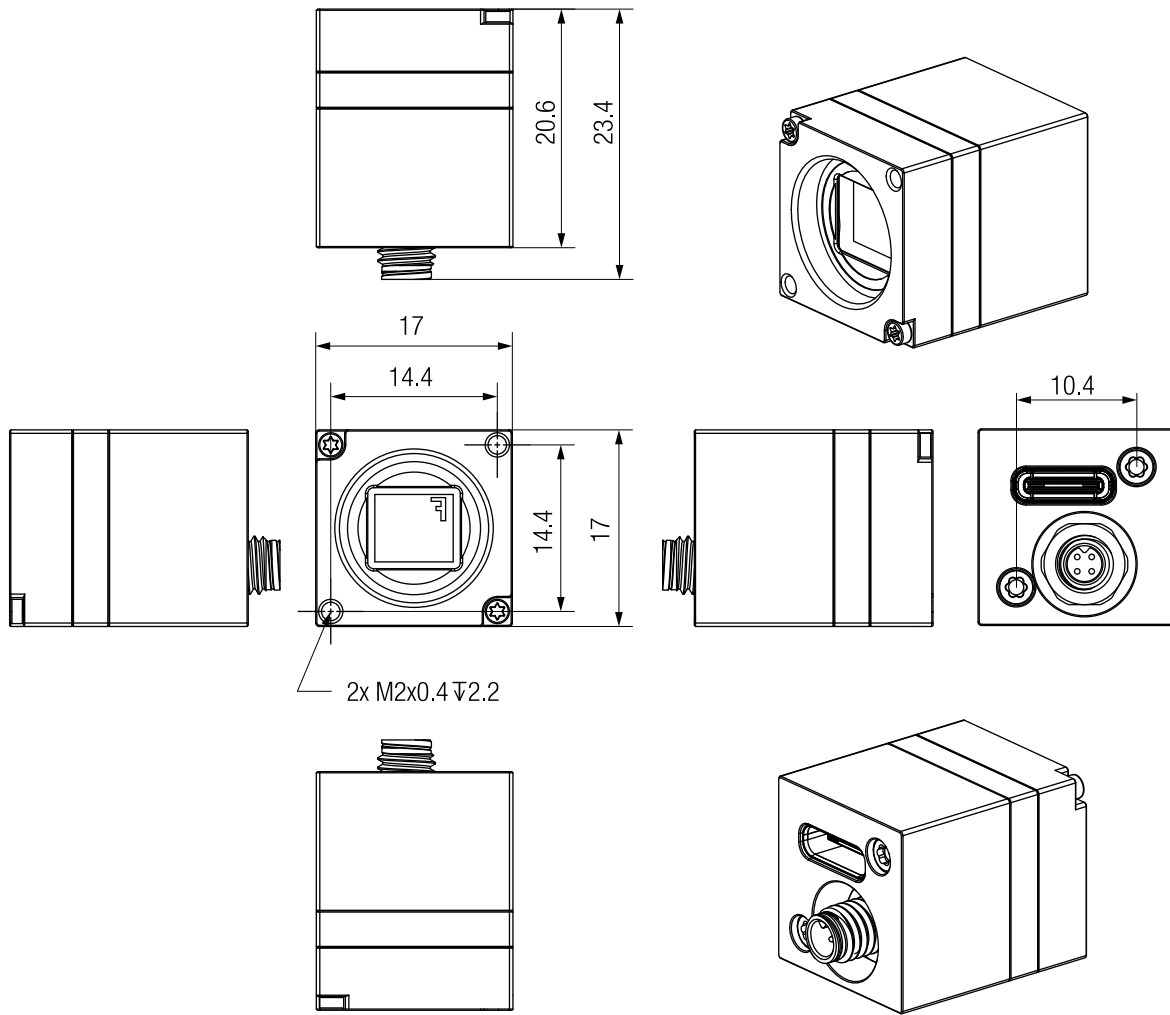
Dimensional drawing of MU051xR-SY with ADPT-MU-17x17-CX3-TC-V adapter
